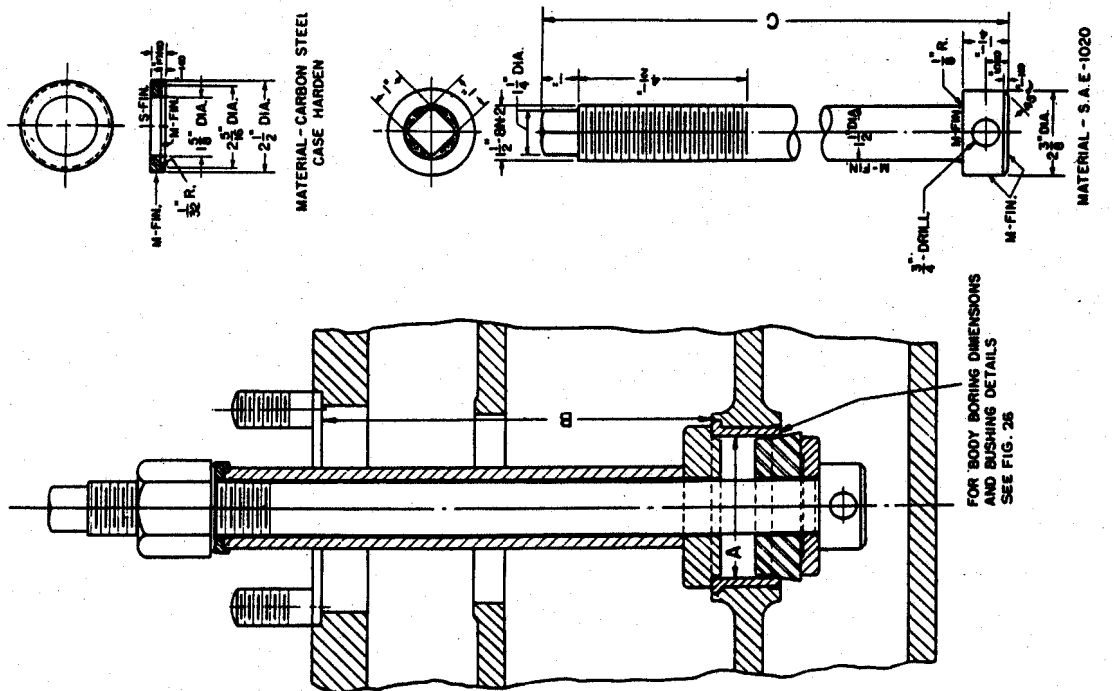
Flaring Tool for Balancing Chamber Bushing
